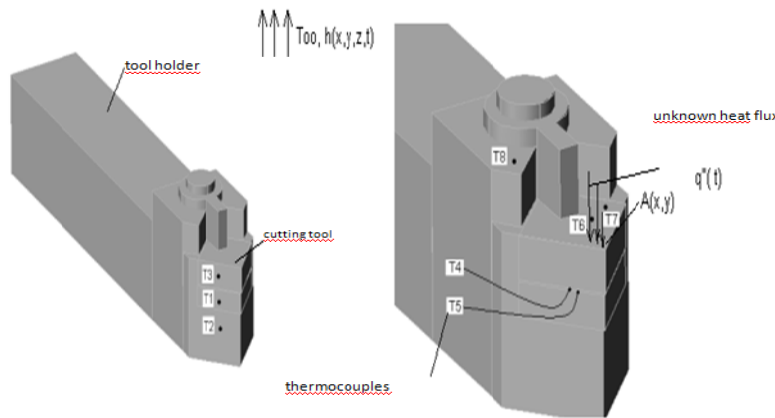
Detailed view of thermocouples welded to the tool.
